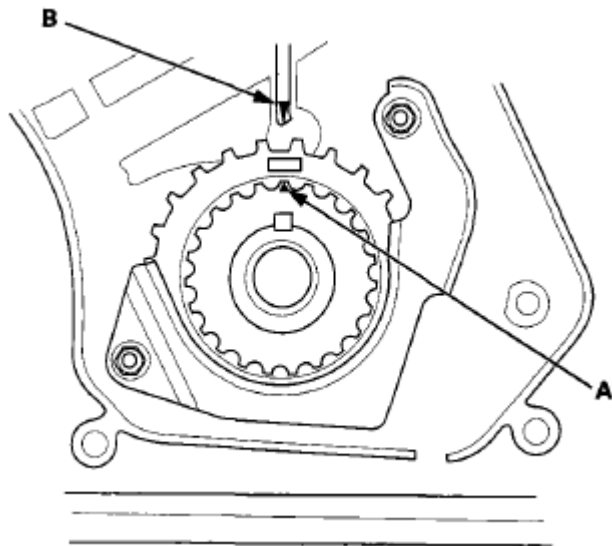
Setting Timing Belt Drive Pulley To Top Dead Center
